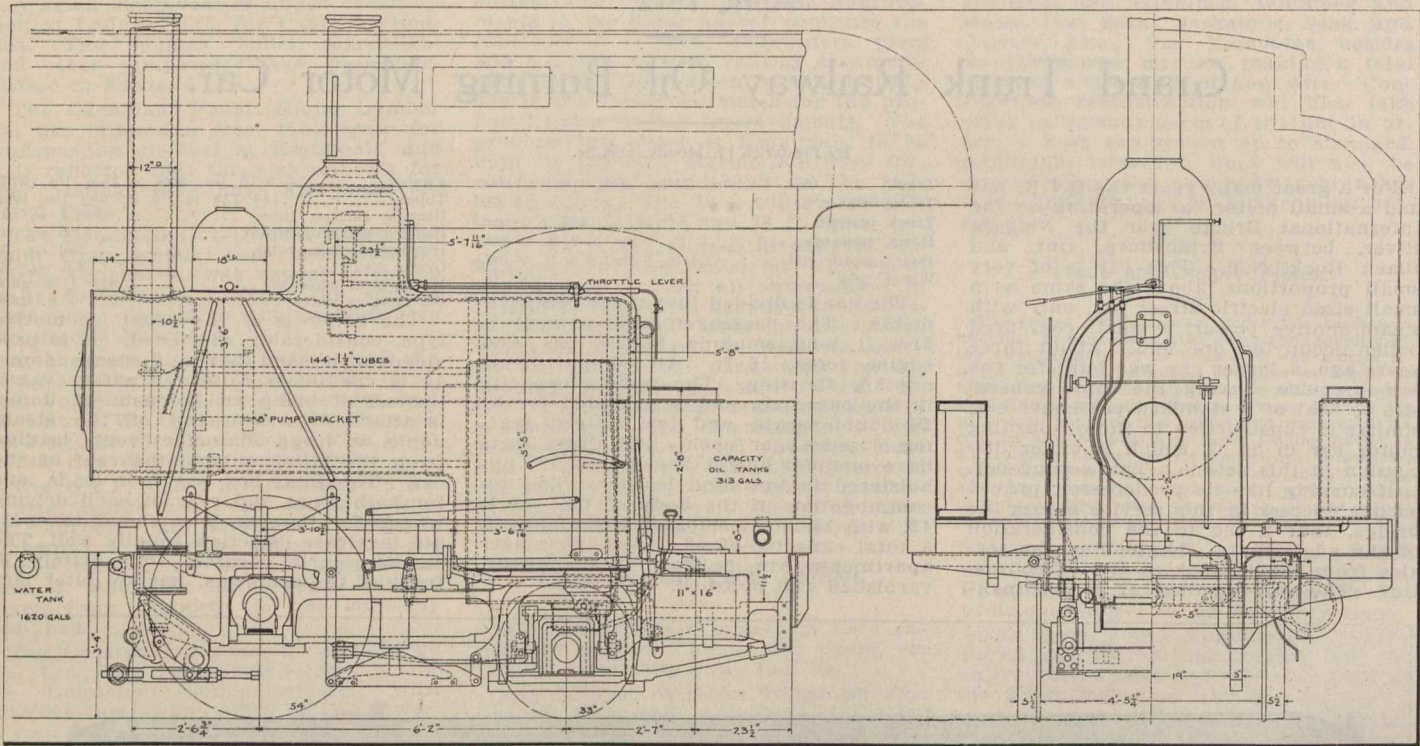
Motive Power Equipment of Oil Burning Motor Car.
